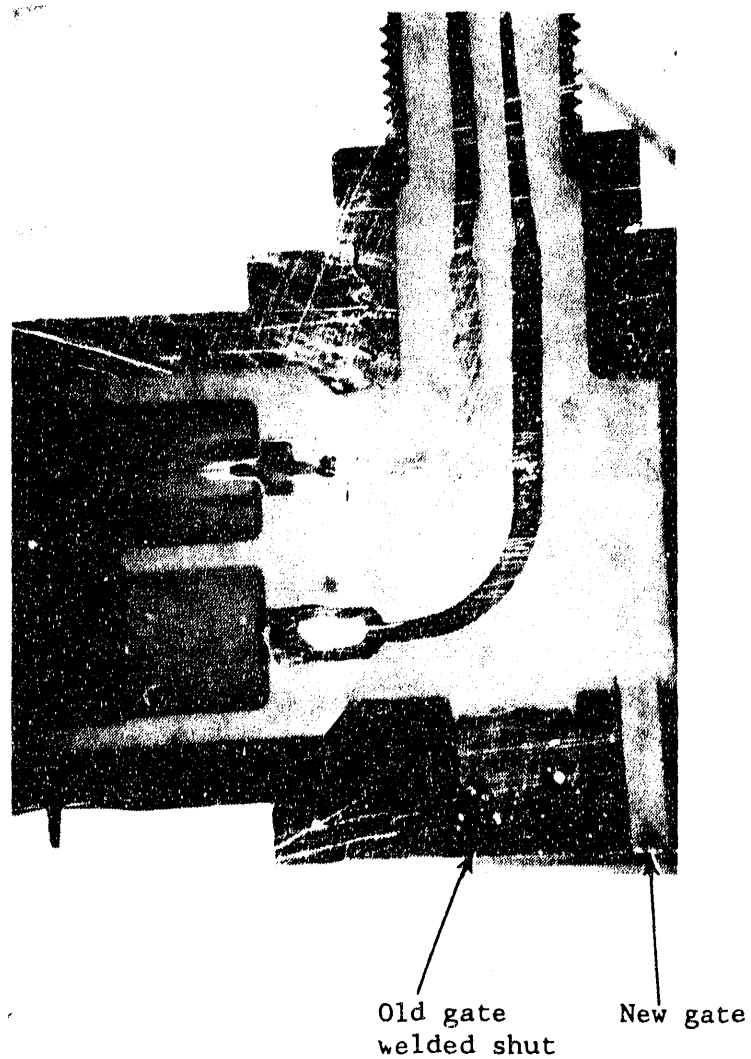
Sectioned header showing the new gate. The original gate has been welded shut.
